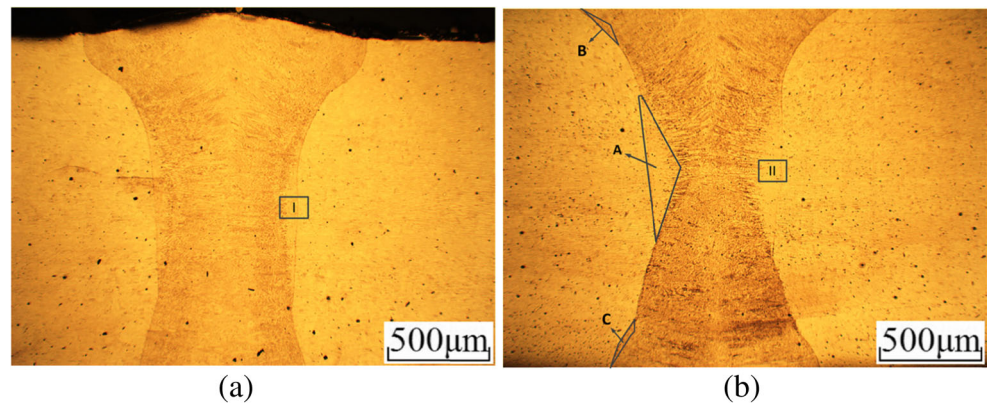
Macrostructure of full penetrated 301 stainless steel weld joints. a 0 mT. b 310 mT
